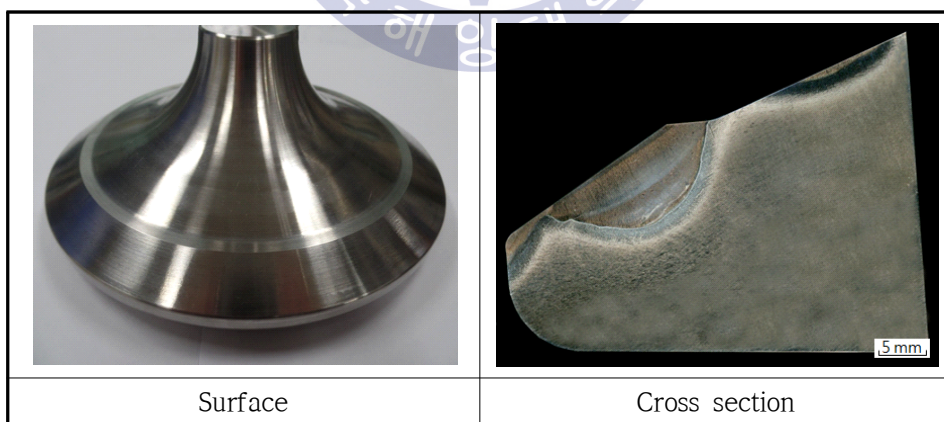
Photos of exhaust valve face with stellite 6 coating by PTA process
